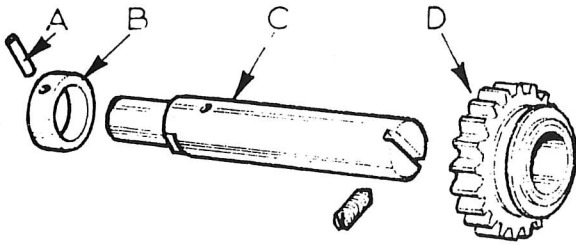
REVERSE IDLER SHAFT ASSEMBLY
